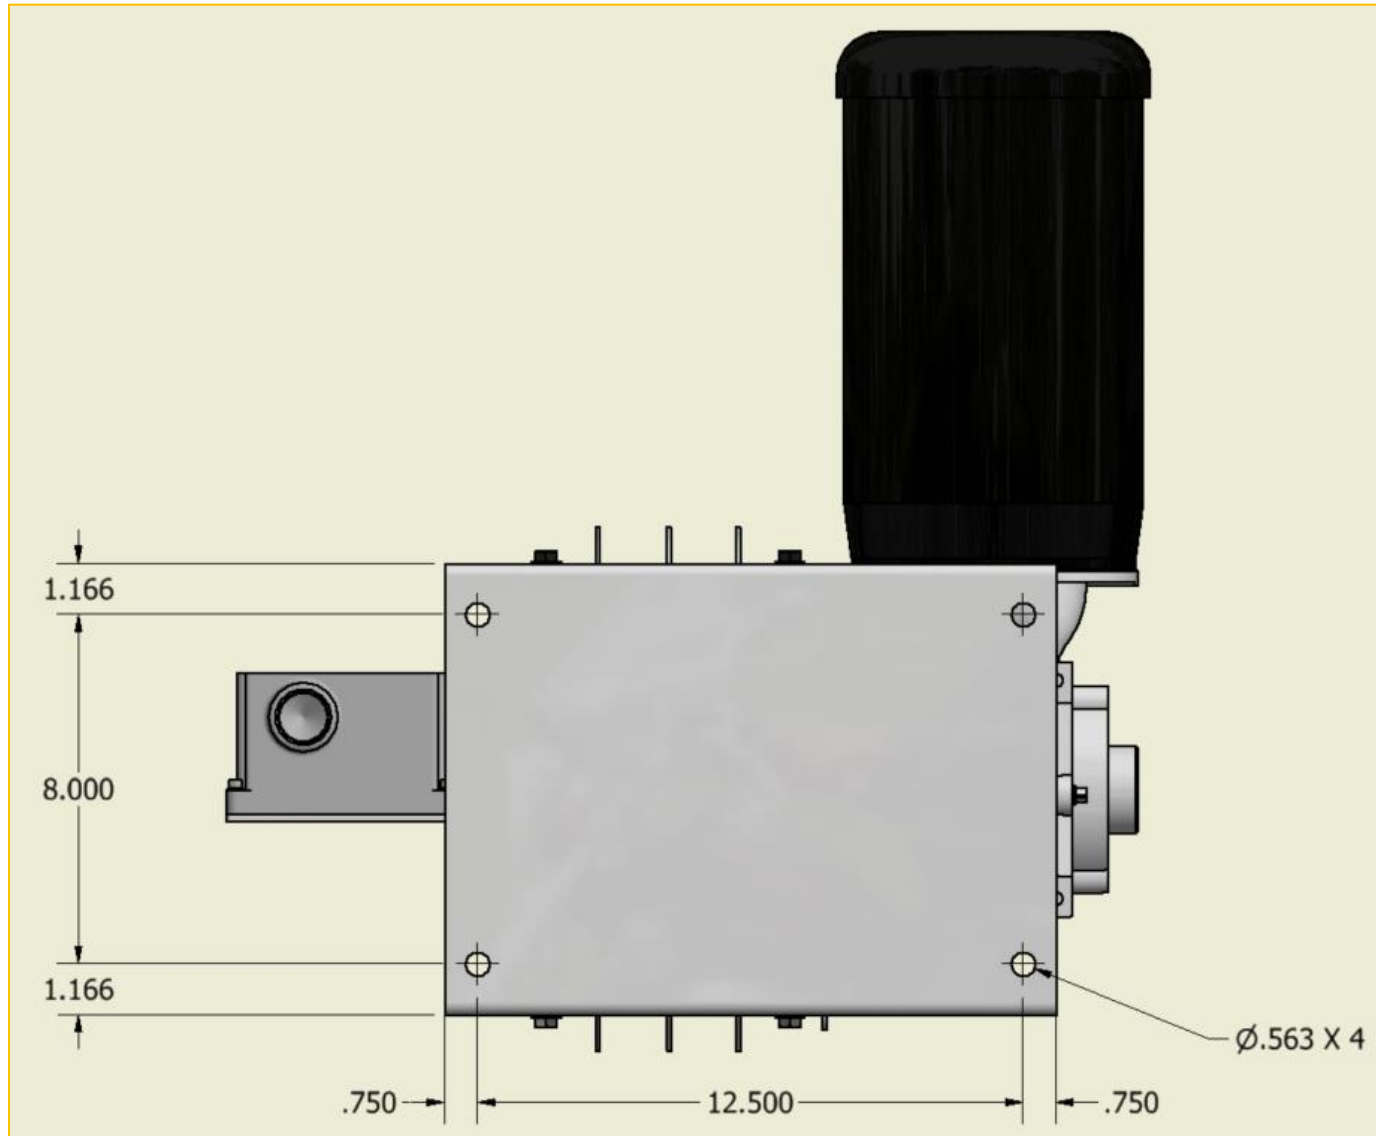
Dual Wire Rope Motor Reel—Mounting Bolt Pattern
